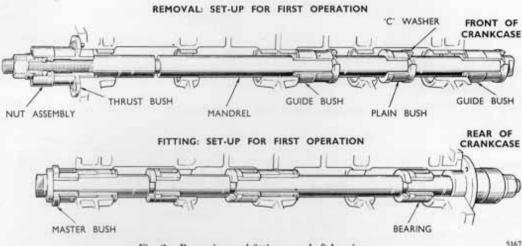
Removing and fitting camshaft bearings — 4-cylinder engine
